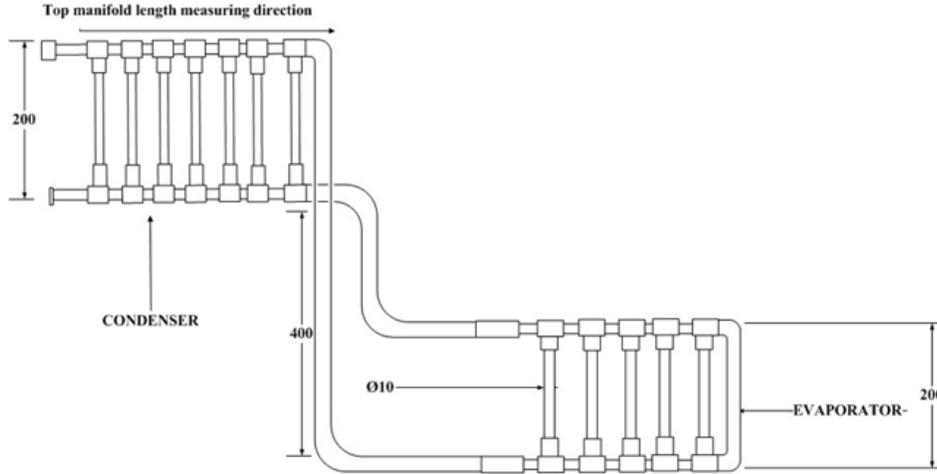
Heat pipe with condenser and evaporator dimensions
